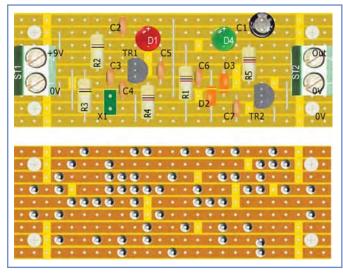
Stripboard layout of the Handy Crystal Checker
